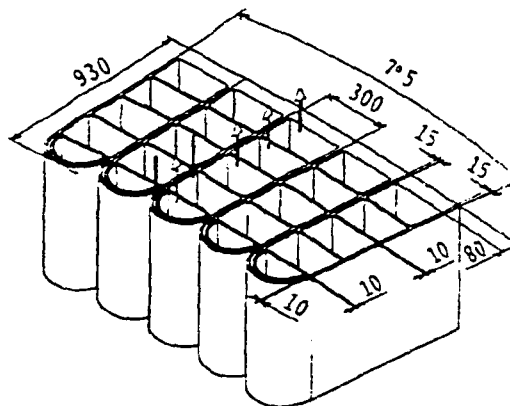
Outboard section of the TAURO concept (dimensions in mm)
